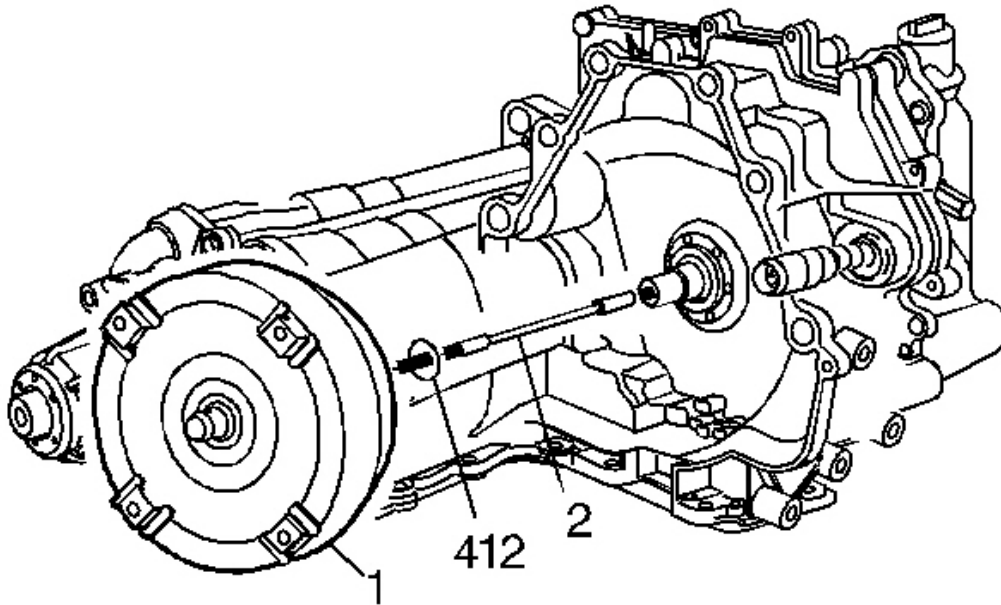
Oil Pump Driven Shaft & Torque Converter
